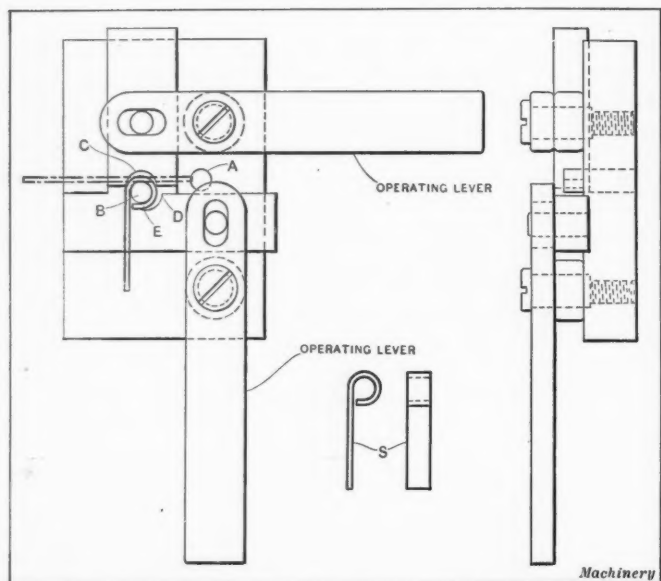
Hand Operated Bending Fixture for producing the Piece S
